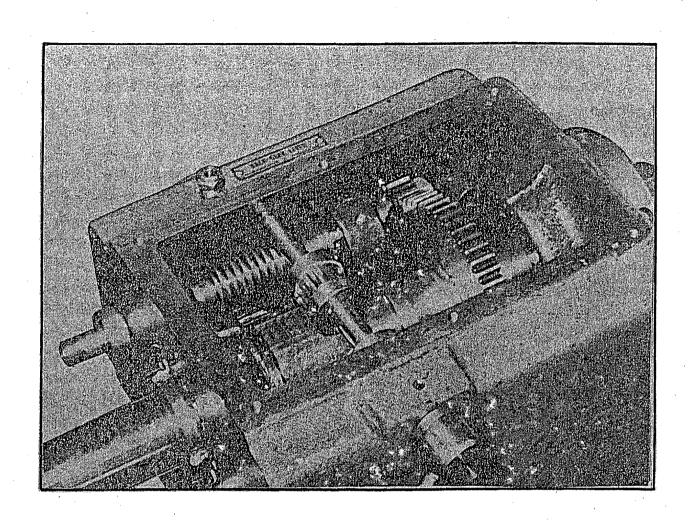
Illustration of headstock with cover removed showing spindle and gears.
